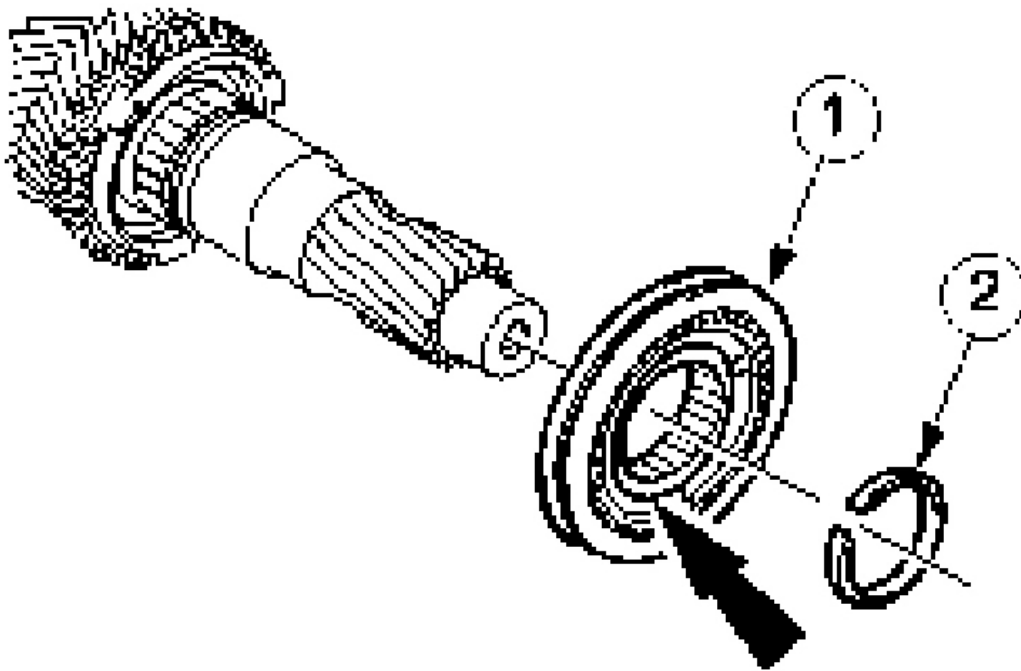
Identifying Installation Position Of Synchronizer Assembly
